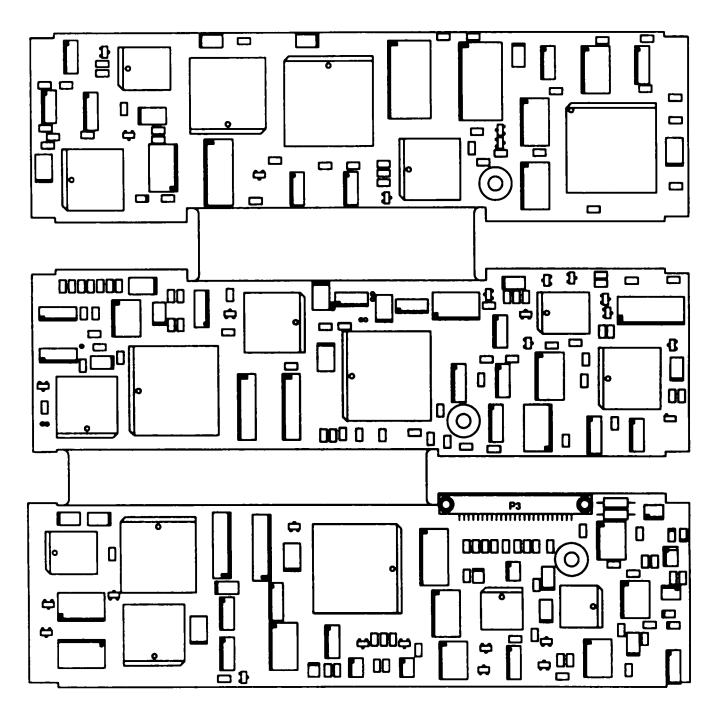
A4 Signal Processor PWB Assembly Component Location Diagram (10303-2500 Rev. C)
